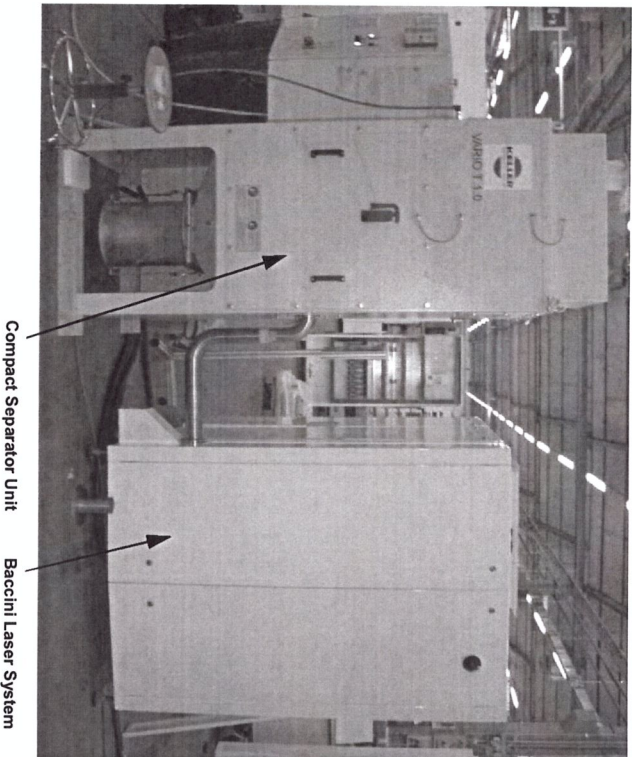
Keller Compact Separator Unit Installed On the Bacchini Laser System
